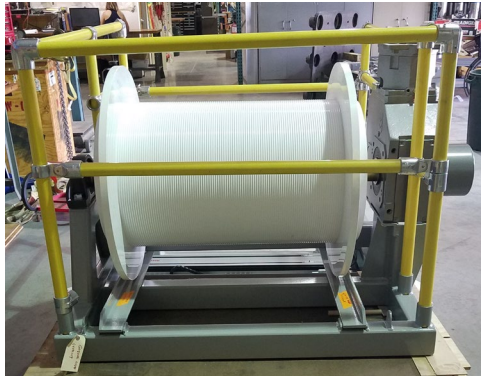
Adjustable rails installed under the winch drum flanges are used to support the drum for swapping drums without the need for lifting equipment.
